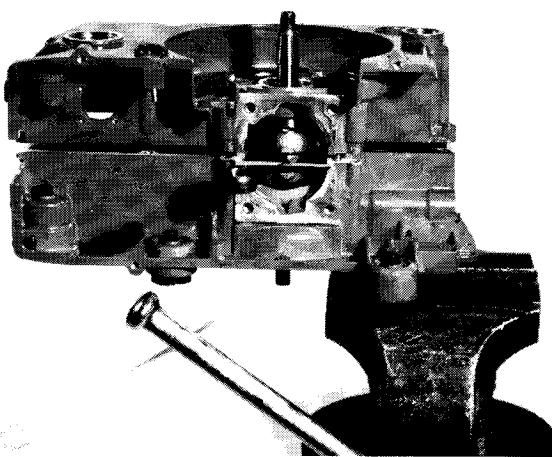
Heat up the other bearing recess and assemble the block. It is best to use a vice as shown in the figure. Ensure that the crankshaft rotates easily. If not, strike lightly on the end of the crankshaft.
